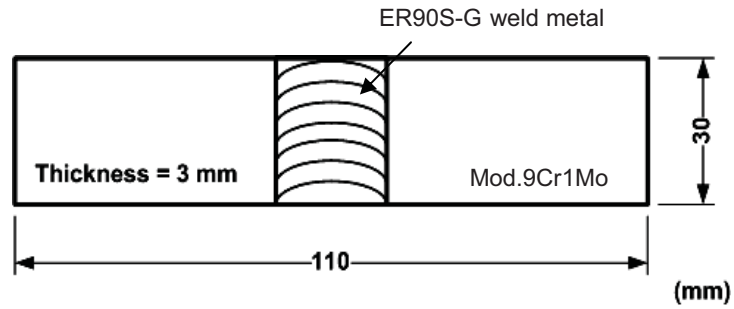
Standard size of specimen for U-type hot cracking test. (Modified 9Cr1Mo weld metal)
